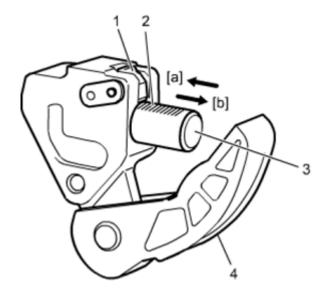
Checking Oil Pump Chain Adjuster Courtesy of SUZUKI OF AMERICA CORP.
